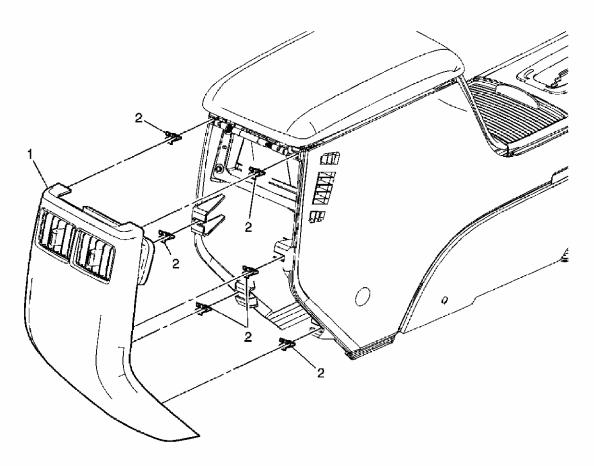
View Of Center Console End Panel Courtesy of GENERAL MOTORS CORP.
